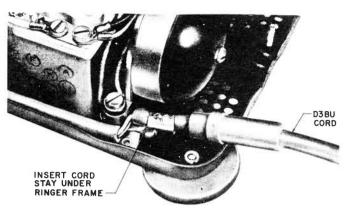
Heavy Duty Cord Used in 500-Type Sets
